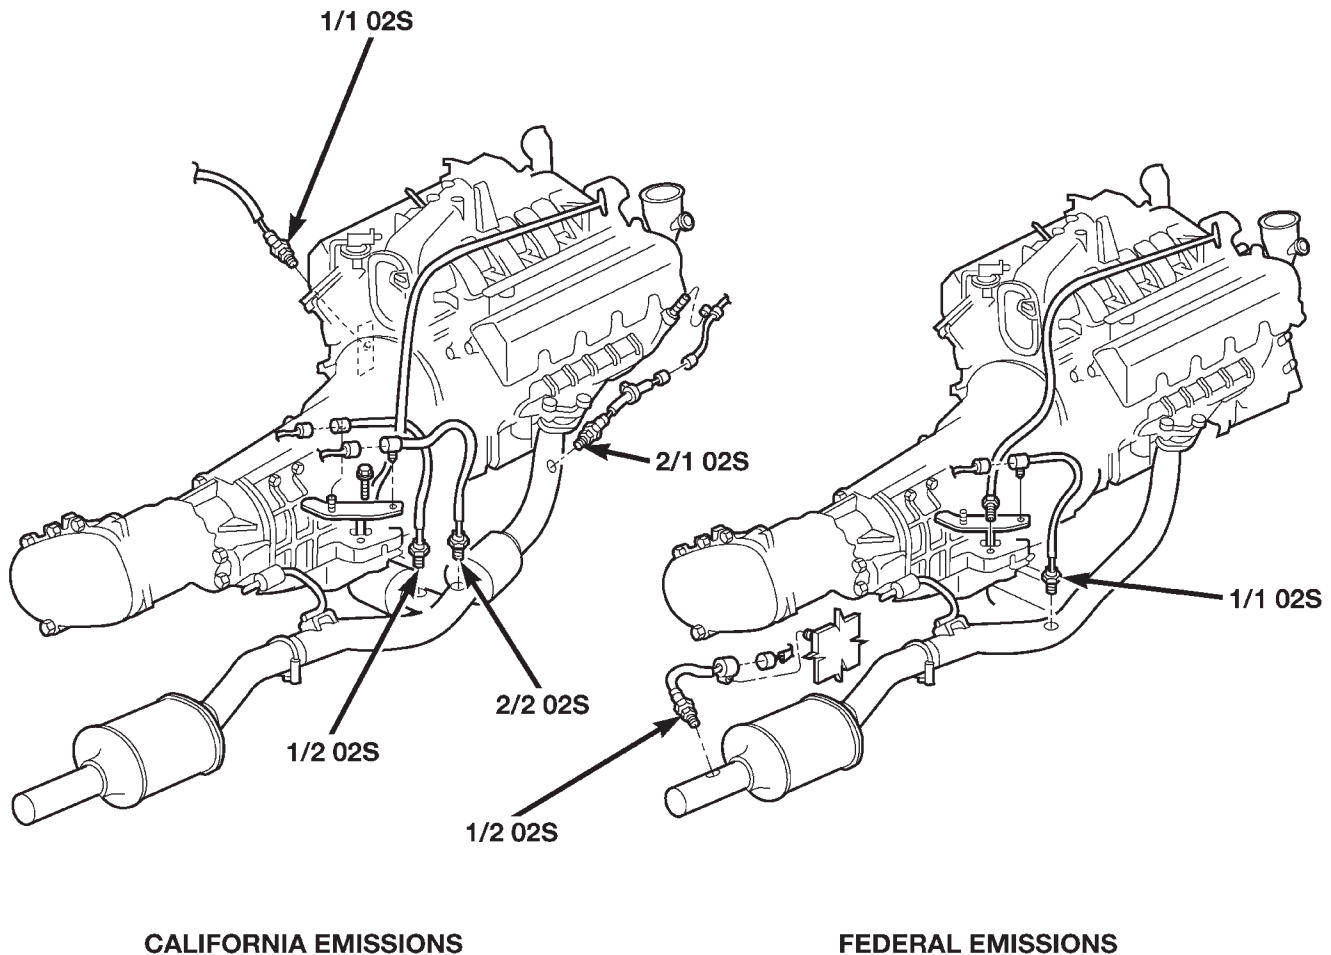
Oxygen Sensor Locations—4.7L V-8 Engine
